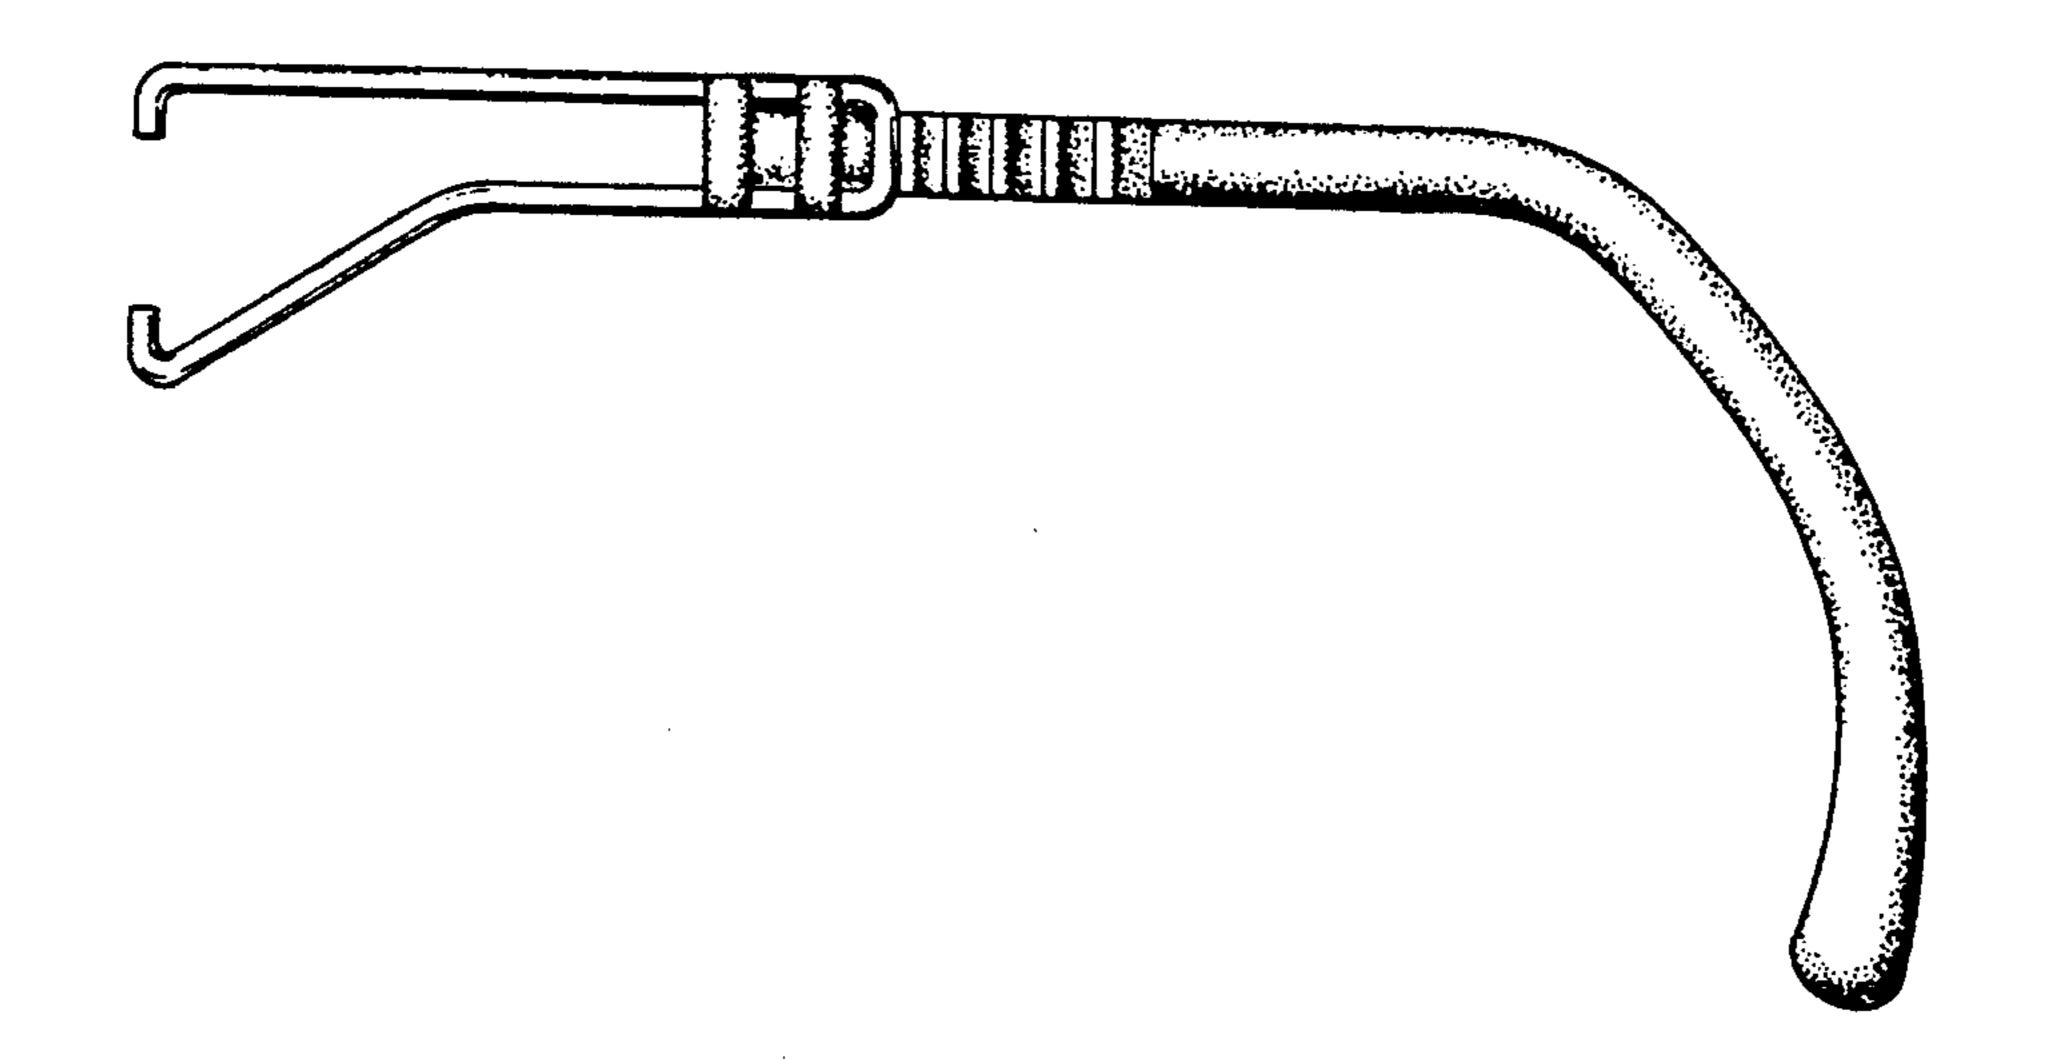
is a front elevational view showing the front guide detached for clarity of illustration;
